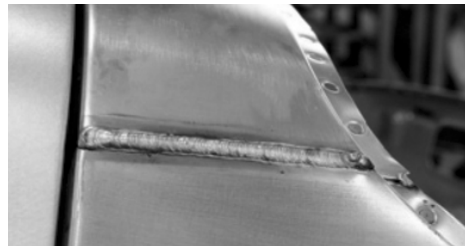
Welding of thickness 3 and 0.3mm aluminium sheet by CMT
